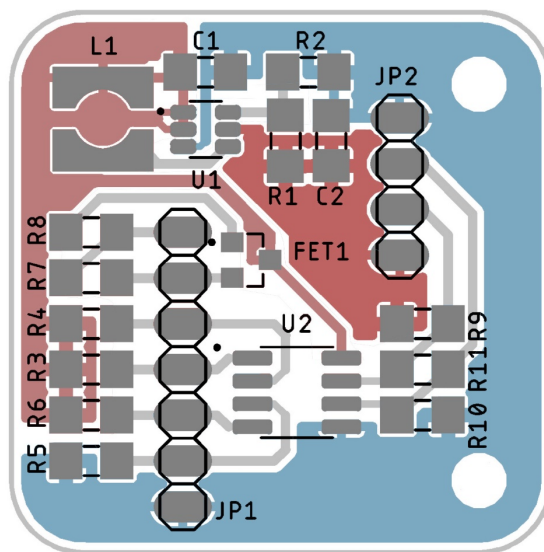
PCB layout of the pyranometer module with the copper layer, soldermask, and silkscreen
